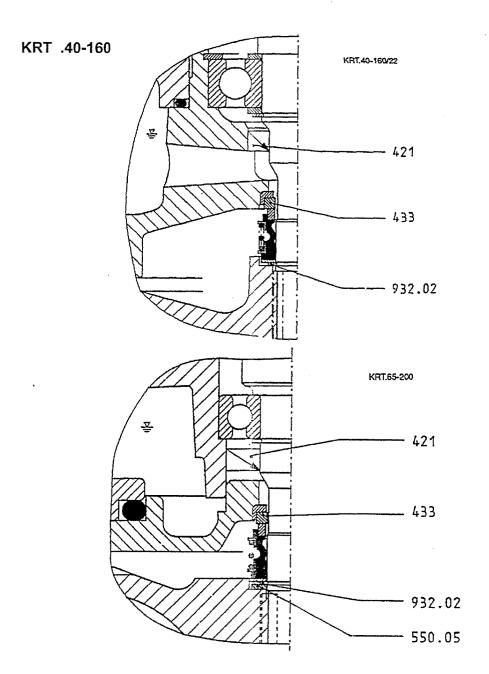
DETAIL "V" MOTOR 22 ONLY FOR FM APPROVED DESIGN
